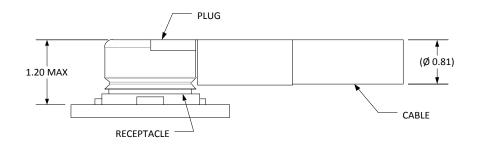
Mated Plug for Ø 0.81 mm Coax Cable
